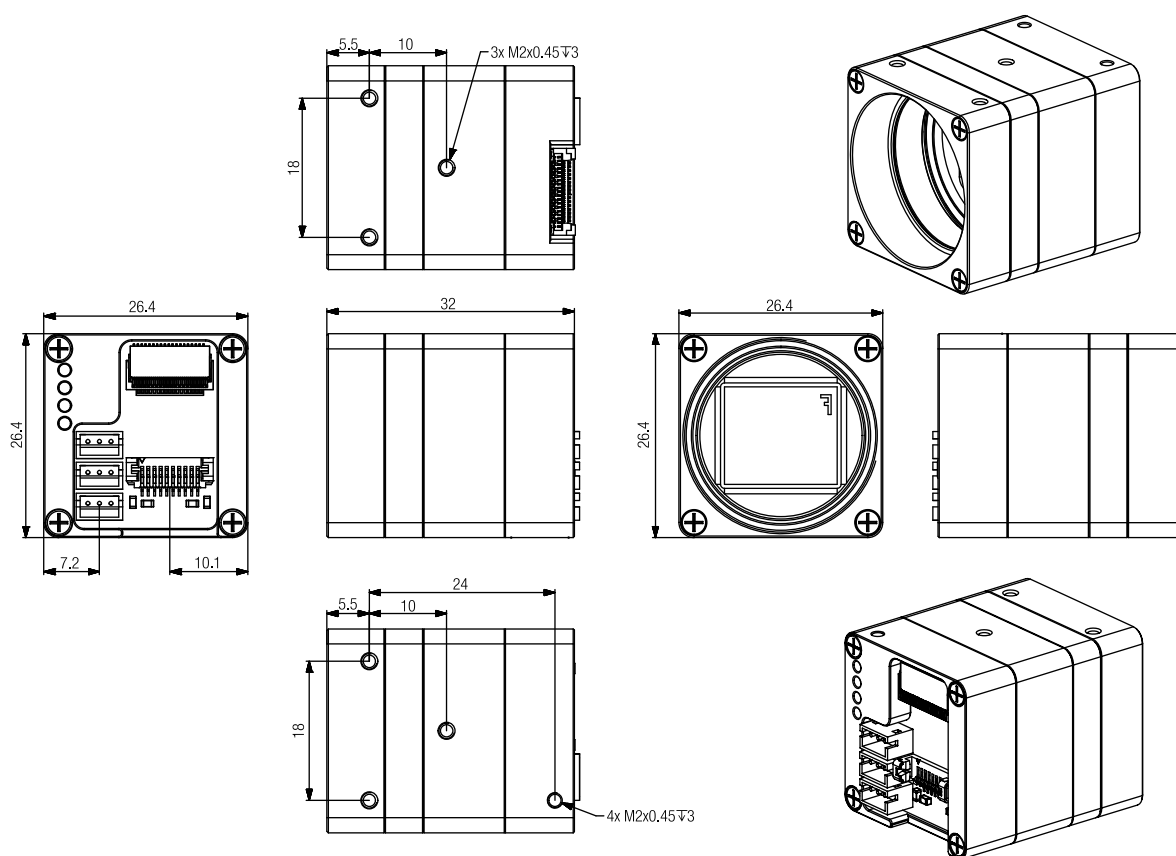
Dimensional drawing of MX081/161/203/245xG-SY-X2G2-FF-HDR (C-mount (with C-mount module B))
